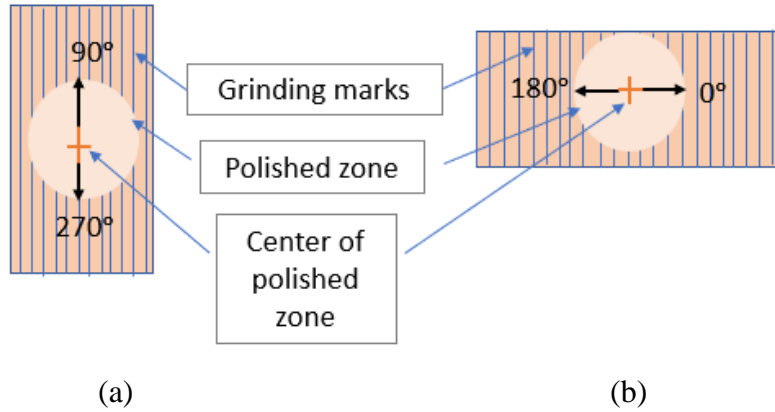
(a) Parallel to grinding marks, (b) Perpendicular to grinding marks
